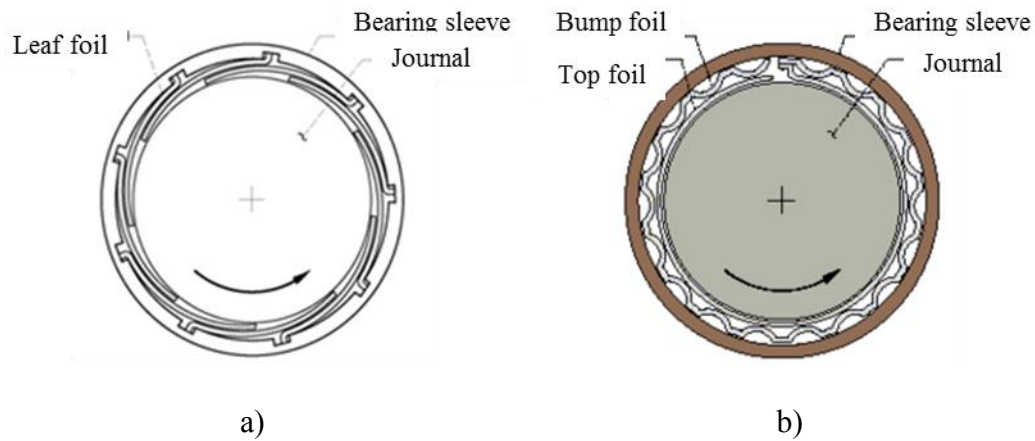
Two designs of foil air bearings [44] a) Schematic of a multi-leaf foil journal bearings, and b) Schematic of bump foil journal bearings
